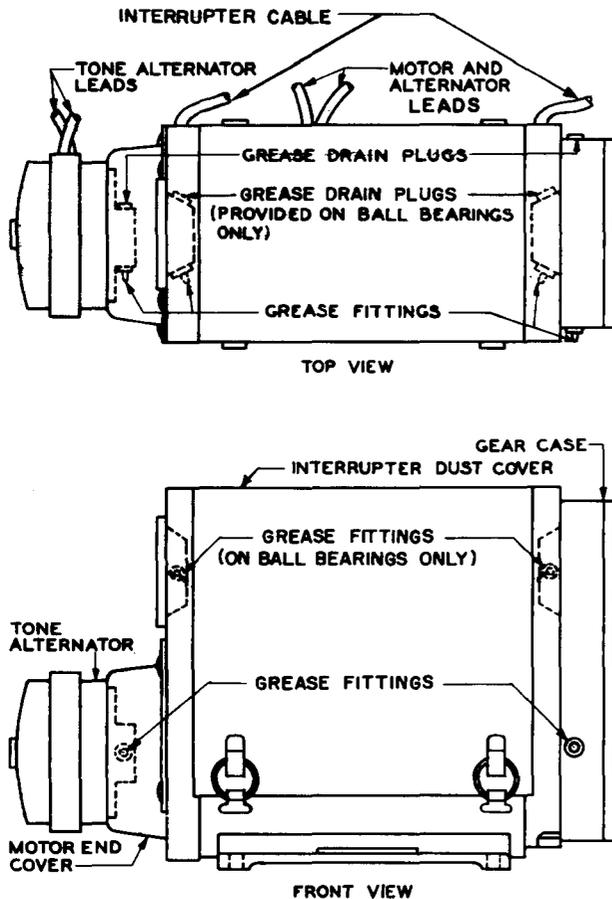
KS-15532 Ringing Machine View Showing Lubrication Points
